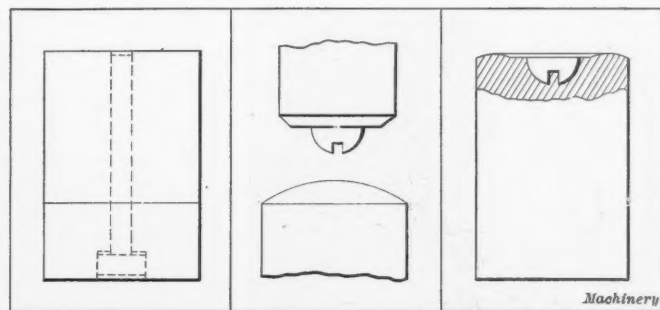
A Kink for saving Die Stock Fig. 36. A "Hub" and a Punch Blank Fig. 37. Punch after hubbing
